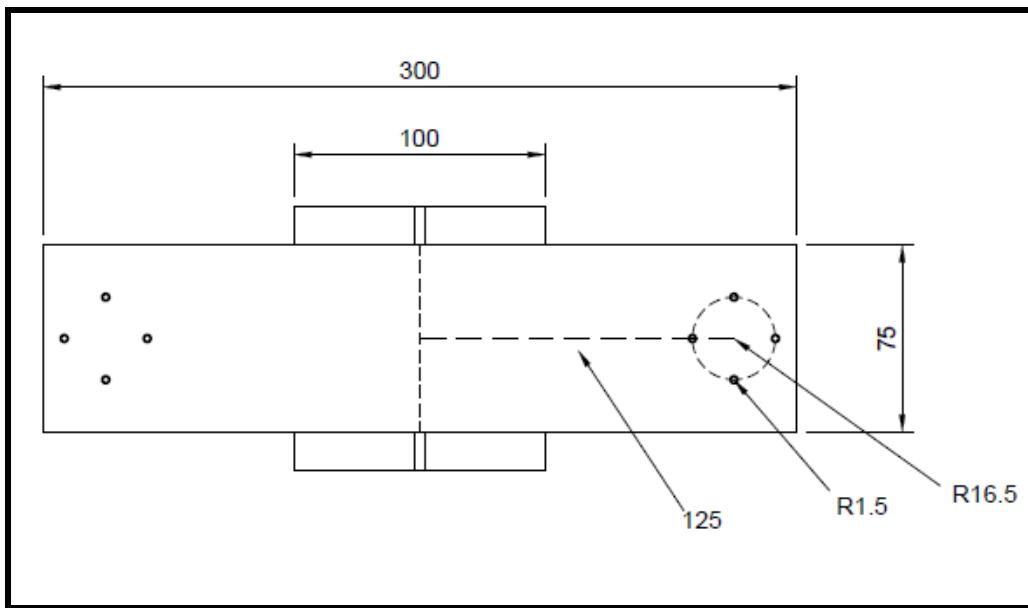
(a) Top view of chassis (showing holes drilled for motor placement)
